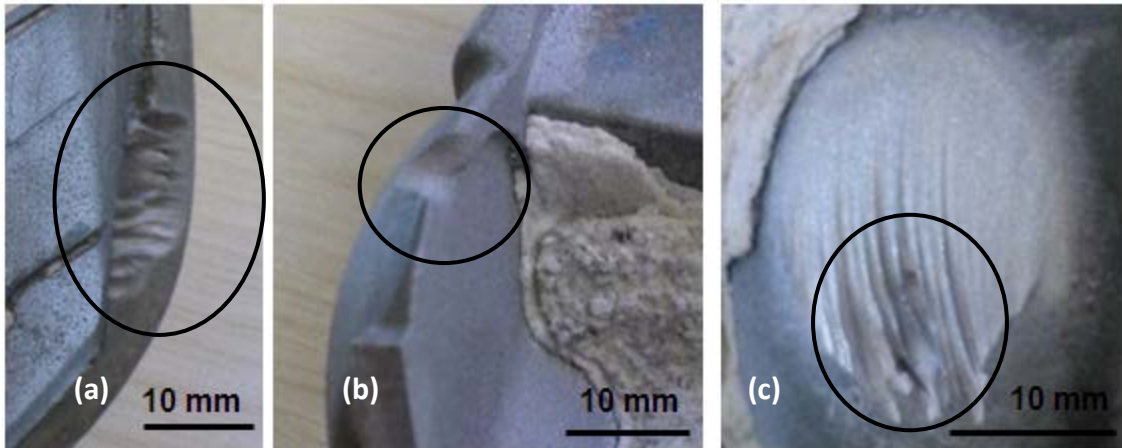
20: Femoral casting damage from incorrect nozzle setup: (a) thin section (b) area below thin section (c) thick section
